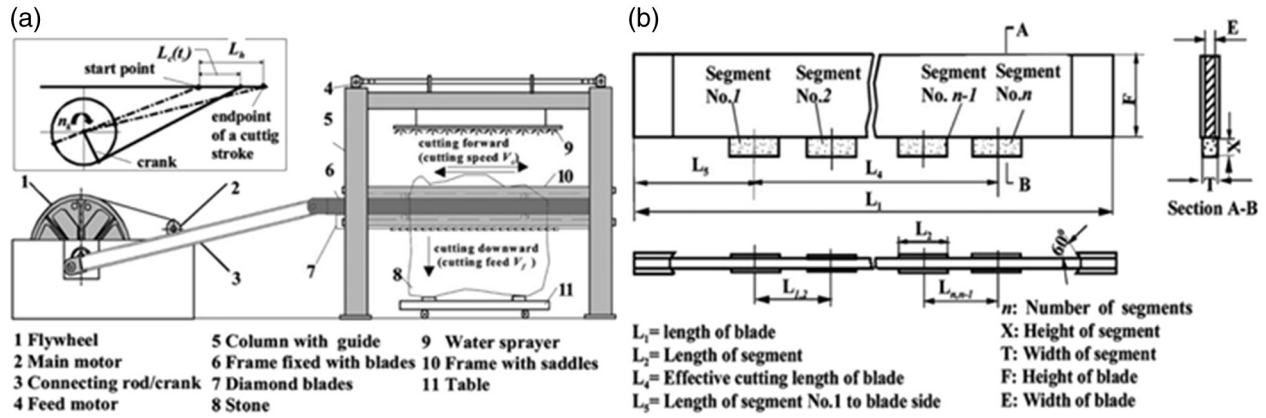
Schematic of the marble frame saw: a frame saw machine and b diamond saw blade [24].
